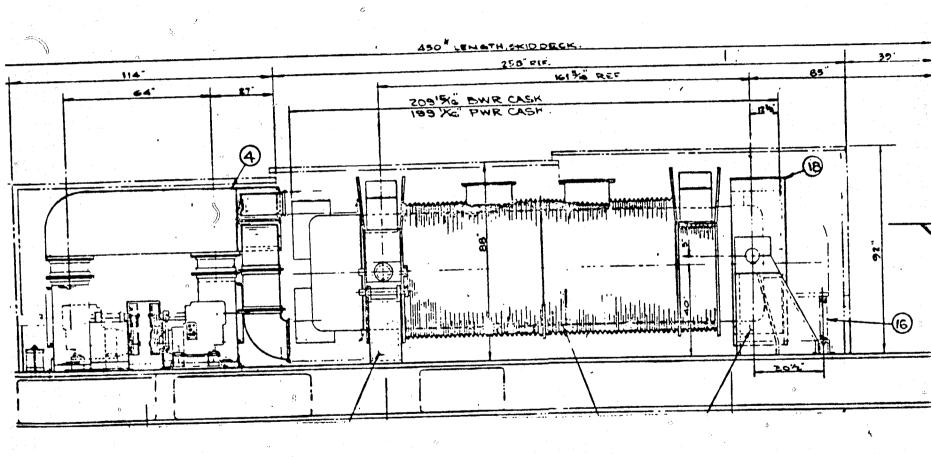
Wet Cask Side View - Showing Cask, Cooling System, Skid and Mounting Cradle (5-2).
